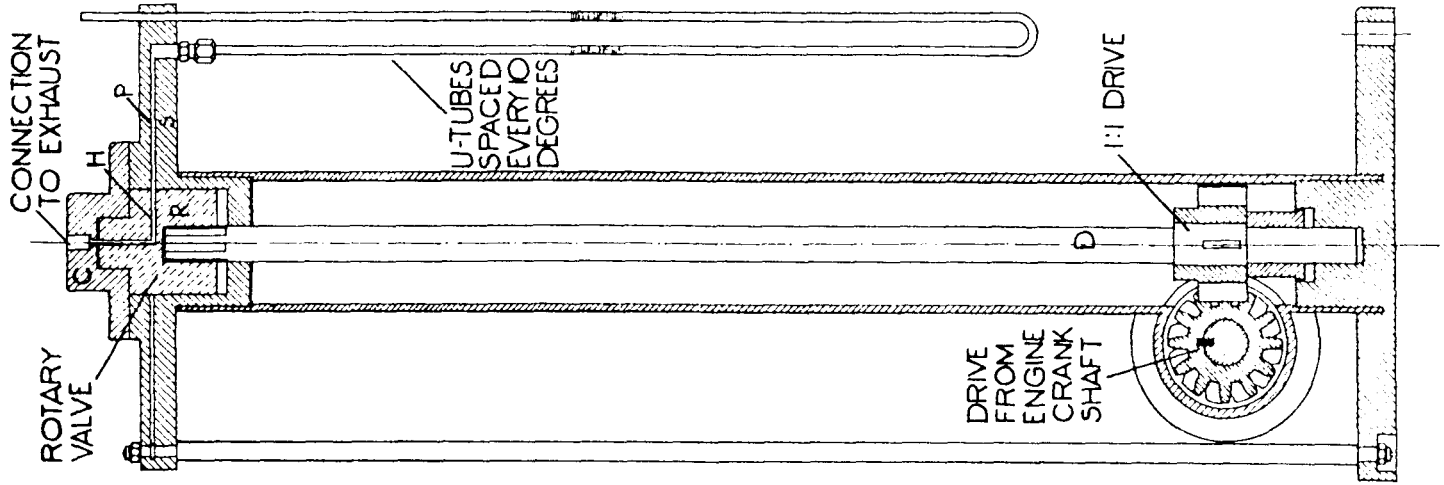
SCHEMATIC DRAWING OF PENN STATE ROTARY VALVE LOW PRESSURE INDICATOR.
